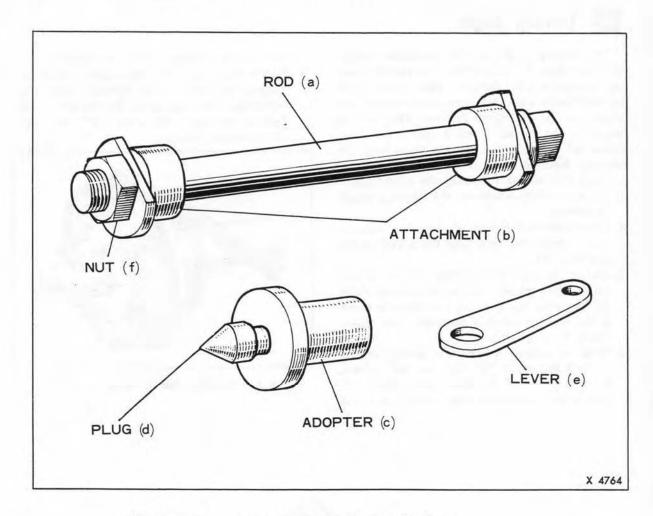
Component of Steering Knuckle Centering Gauge
